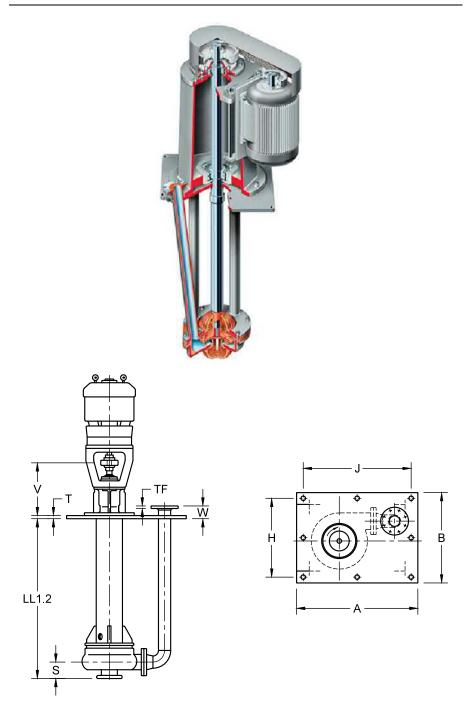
Vertical, sump, single-stage, cantilever impeller and shaft pump. Courtesy of Worthington a division of Ingersoll Dresser Pump Company.
